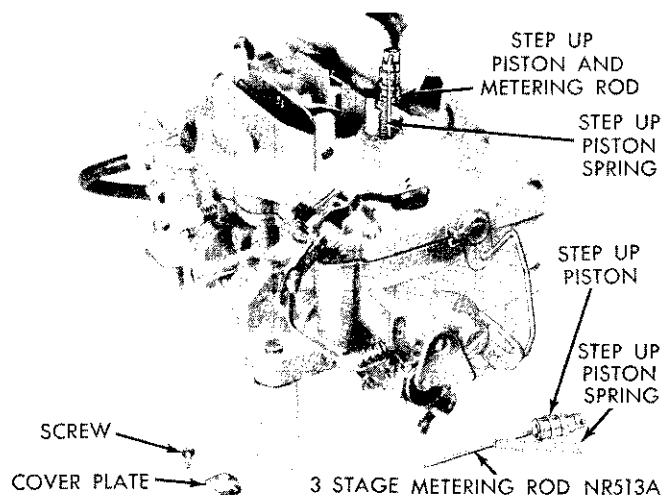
Removing or Installing Step-Up Pistons and Rods
